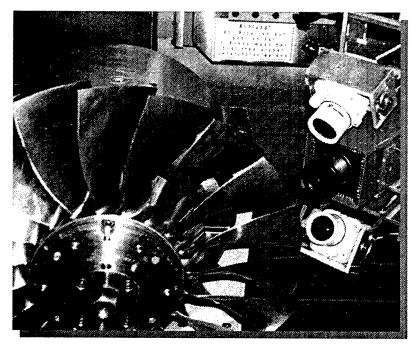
Optical sensor system in milling cell for blisk measurement (MTU)
